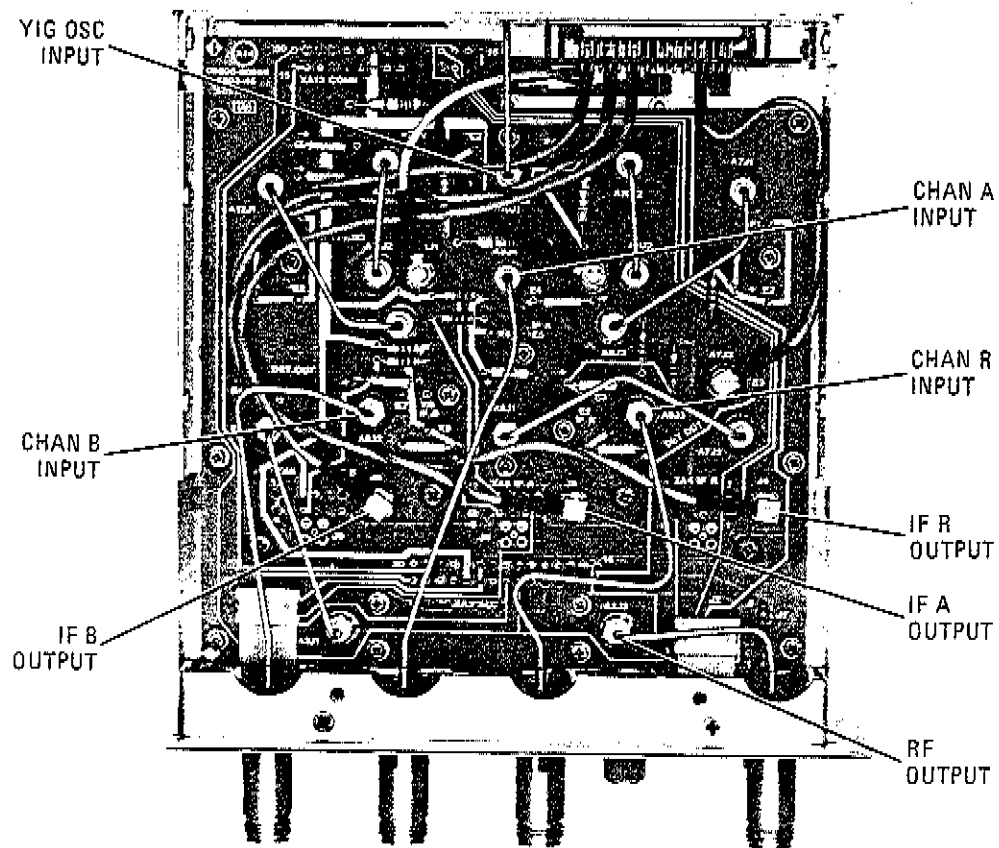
A1 Bottom View Showing Interface Connections to Mother Board
